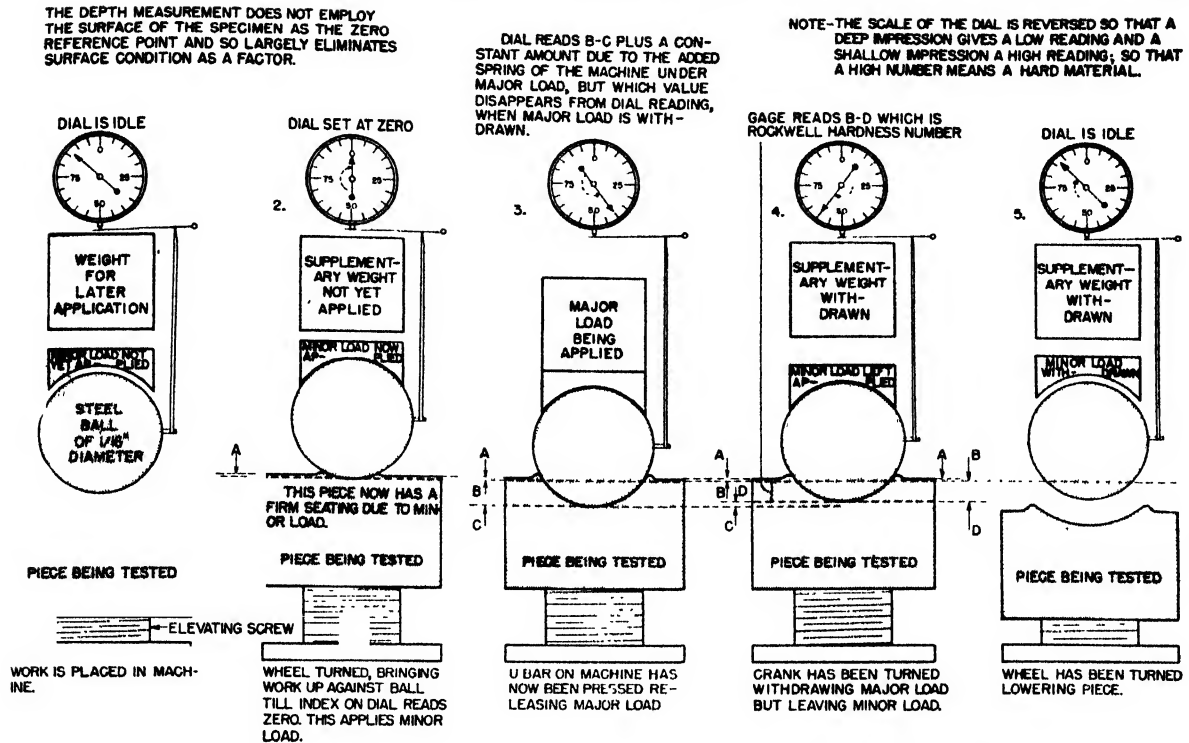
18. Sketches illustrating principle of operation of Rockwell hardness testing machine. (Courtesy, Wilson Mechanical Instrument Div., American Chain and Cable Co., Inc.)
